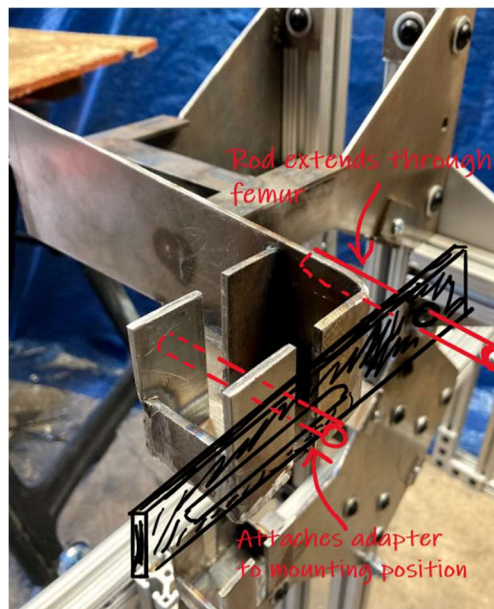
TEST JIG DESIGN SOLUTION. ADAPTER ADDED TO UPPER MOUNTING POSITION.
